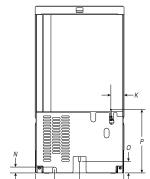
DETAILED PLANNING DIMENSIONS 15" ICE MACHINES
